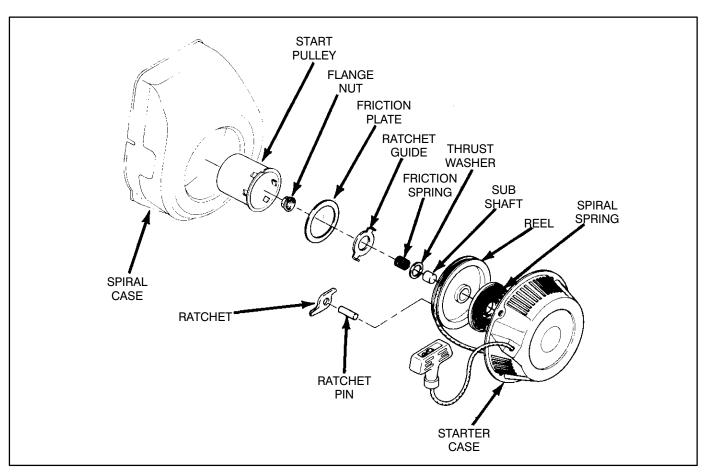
TYPICAL RECOIL STARTER ASSEMBLY
